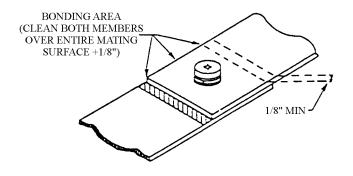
Bracket Installation (Rivet or Weld)
